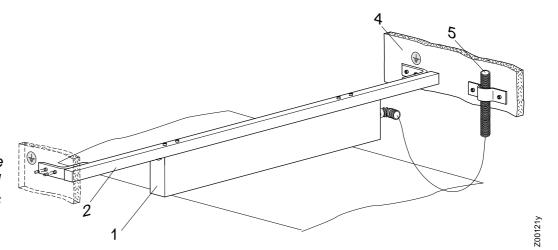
Assembly example R50 with GRP rod and steel brackets for attachment to the machine wall
